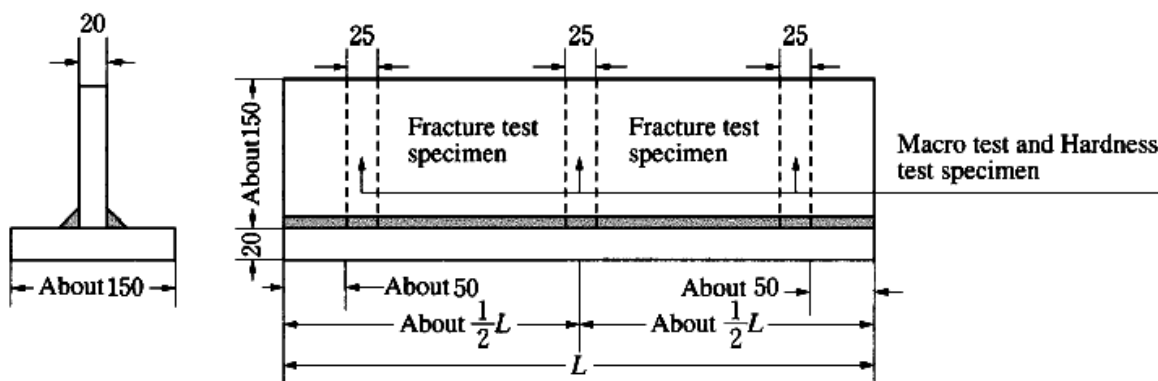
Fillet Weld Test Assembly (Unit: mm)
